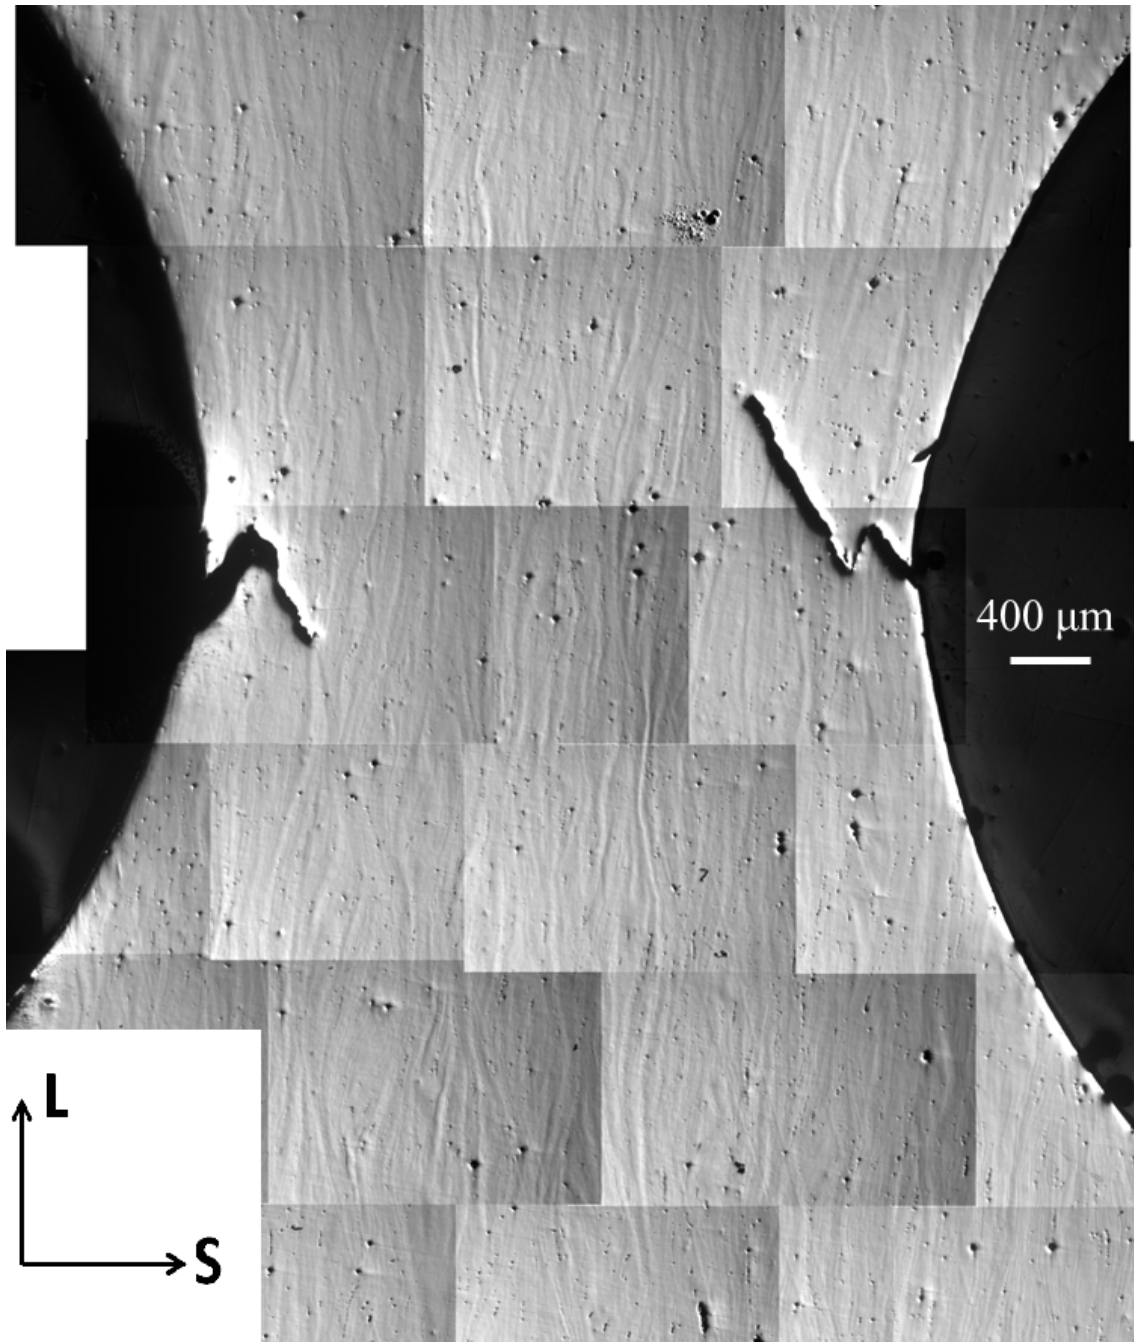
L-S view of the central section of the RN10 specimen loaded parallel to L direction, after macroscopic crack initiation and before fracture. The same specimen from which Figure 36 is acquired is employed to obtain this graph. Shear zones that connect macrocracks to the free surface are easily discernible on both sides of the specimen.
